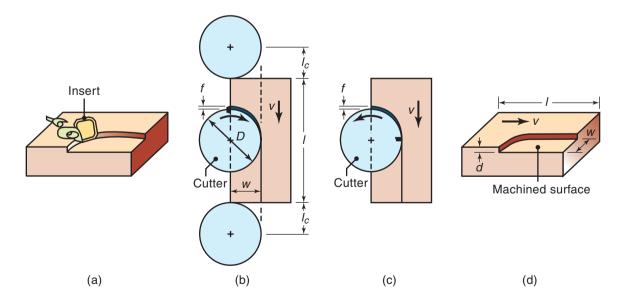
(a) Face-milling operation with cutter removed, showing the action of a single insert; (b) climb milling; (c) conventional milling; and (d) dimensions in face milling. The width of cut, *w*, is not necessarily the same as the cutter radius.
